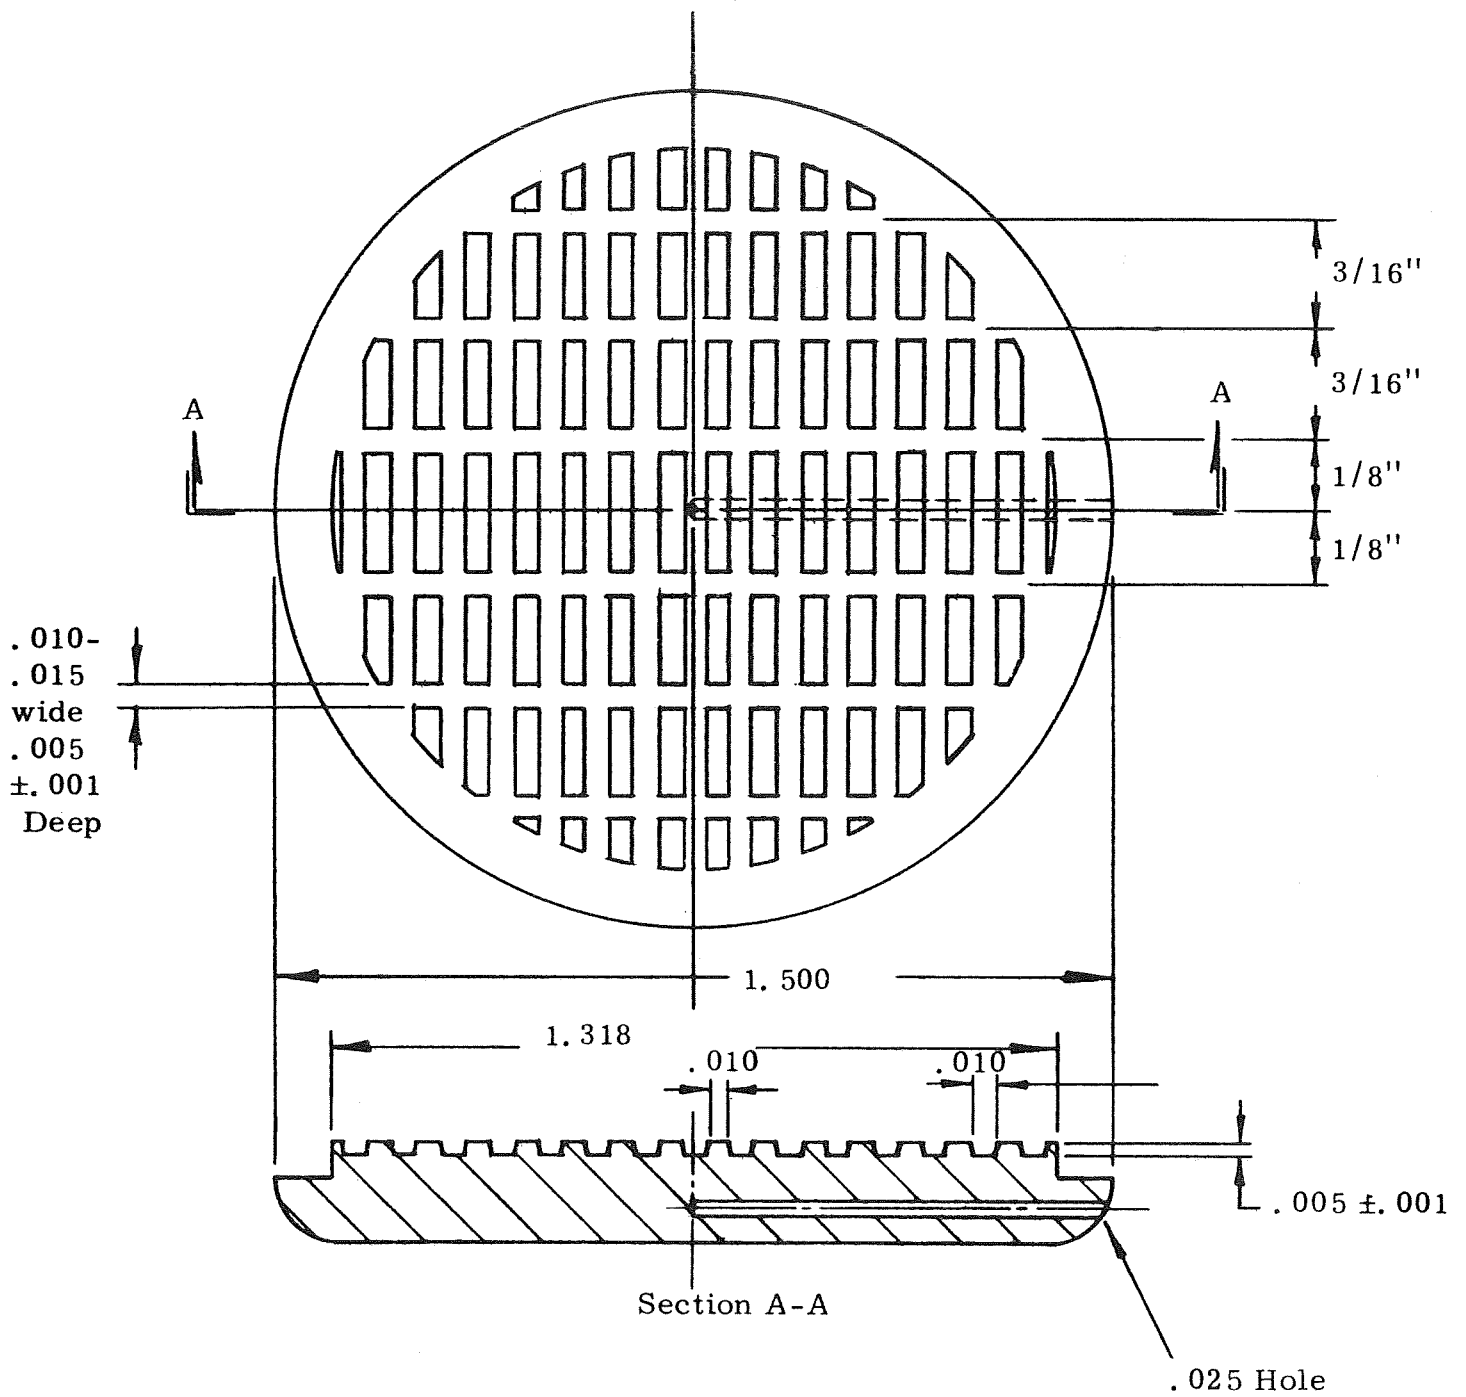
Heat Pipe No. 5 Evaporator Wick (Pre-Test)
